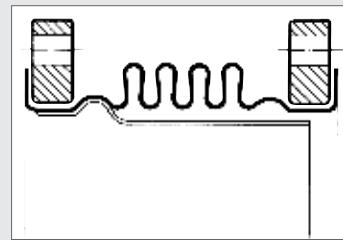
Axial expansion joint with one-piece, inner sleeve with reduced diameter
